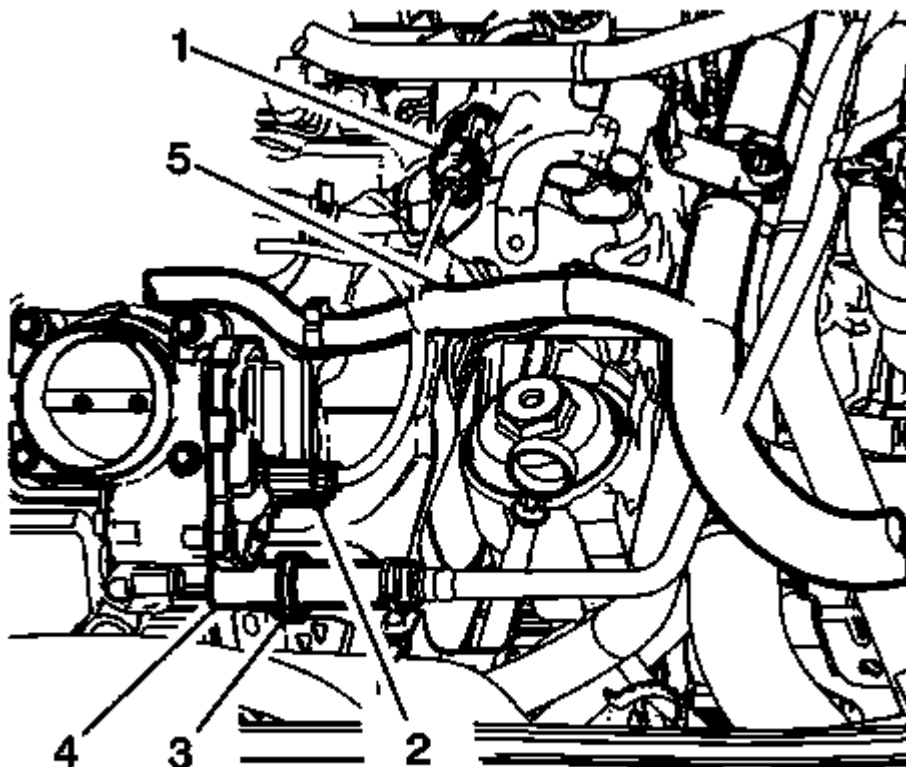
Engine Harness And Vacuum Brake Booster Hose
